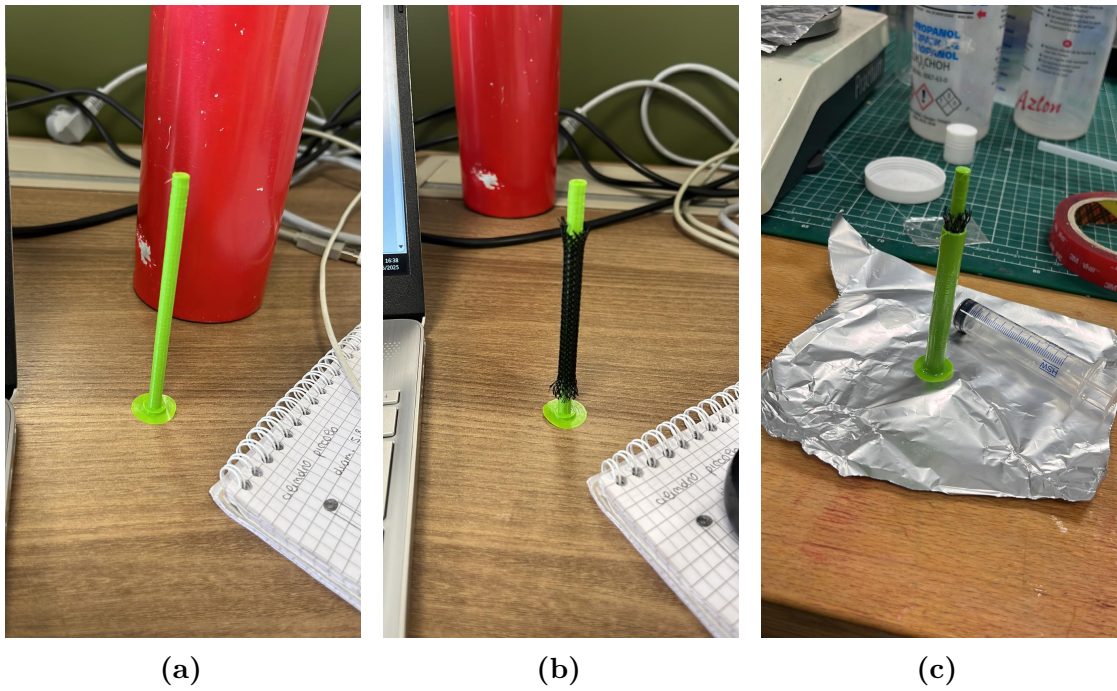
Preliminary fabrication attempt using 3D-printed PLA tooling: (a) inner cylindrical core for sleeve alignment, (b) braided sleeve mounted on the core, (c) assembly placed inside an external cylindrical shell to contain the silicone during curing.
